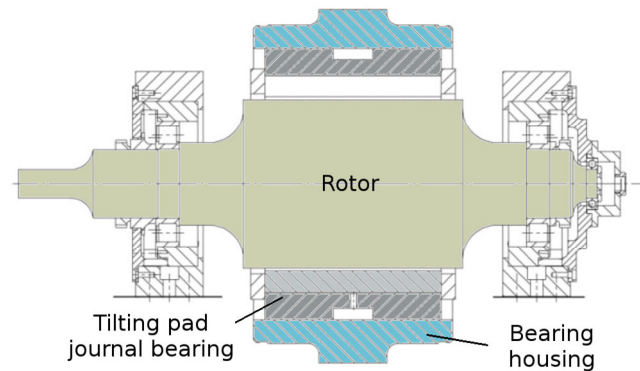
Schematic of test zone with tilting pad journal bearing.
